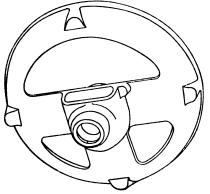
PERSPECTIVE VIEW OF END-SHIELD CASTING IN THE ROUGH
